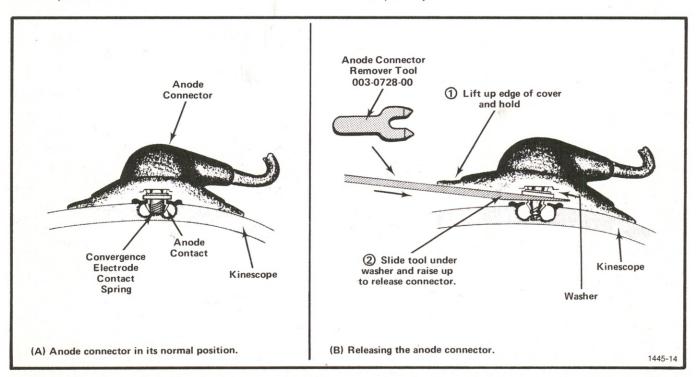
Cross section view of kinescope anode connector. A special plastic tool with a wedge-shaped tip is used to release the anode connector.
